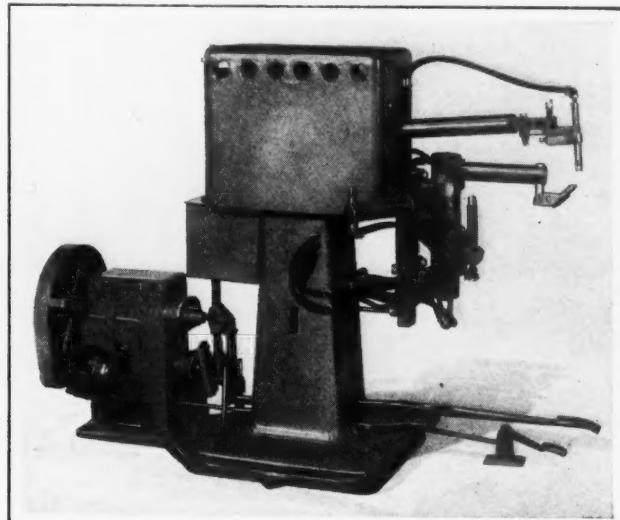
Spot-welder with Multiple Electrode Holder
